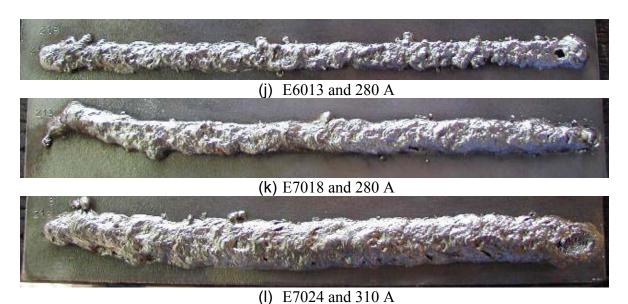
Pictures of the bead-on-plate wet welds deposited with the three electrode types using electrode negative on A36 steel plates at 100 m.
